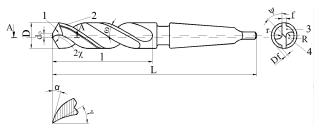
Helical drill: 1 – the main cutting edge; 2 – secondary cutting edge; 3 - tooth; 4 - channel.
